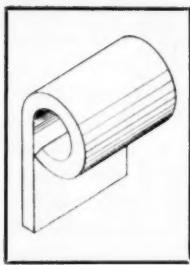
For machine parts, the wire may be dispensed with and a nearly 360-degree roll made without further stiffening media.
